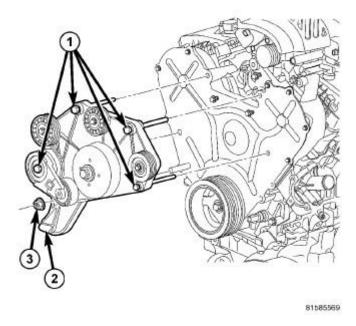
Accessory Drive Bracket & Fasteners Courtesy of CHRYSLER LLC
